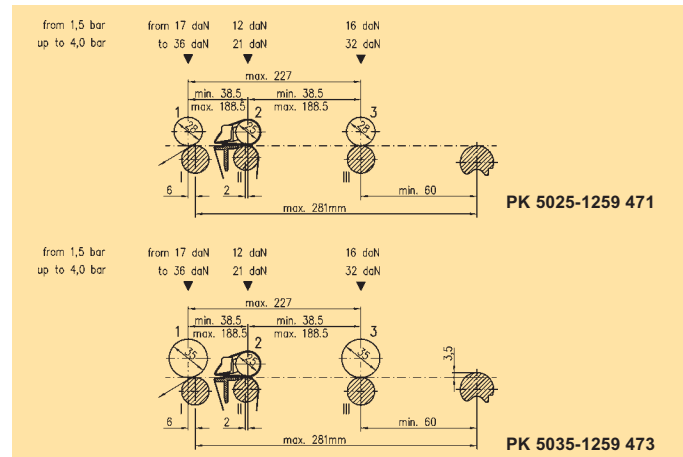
Fig. C: Draft arrangements PK 5000 for 3-roller versions
